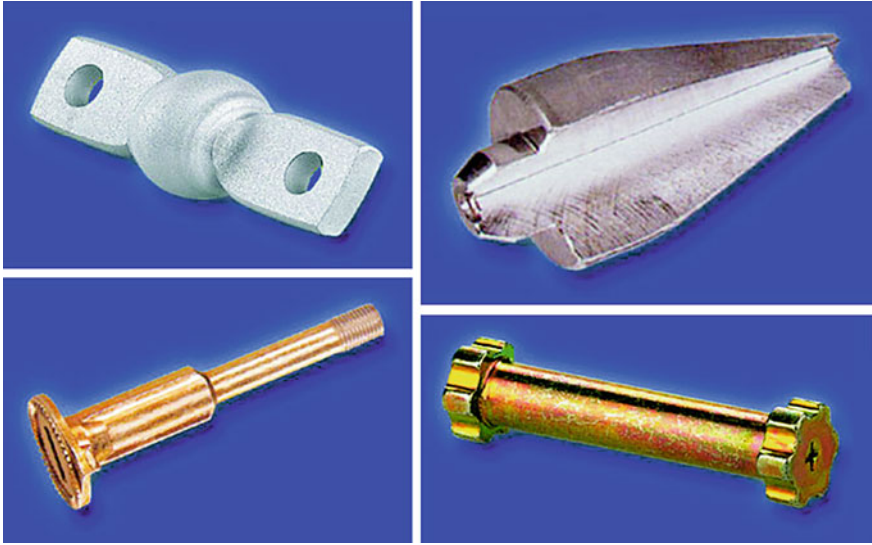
Manufacturing examples of components whose manufacture includes an upsetting operation (Source A.&E Keller GmbH)
